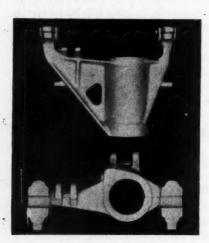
Left-Landing-gear shock strut for carrier fighter plane. Formerly a forging, part is now a heat-treated steel castina
